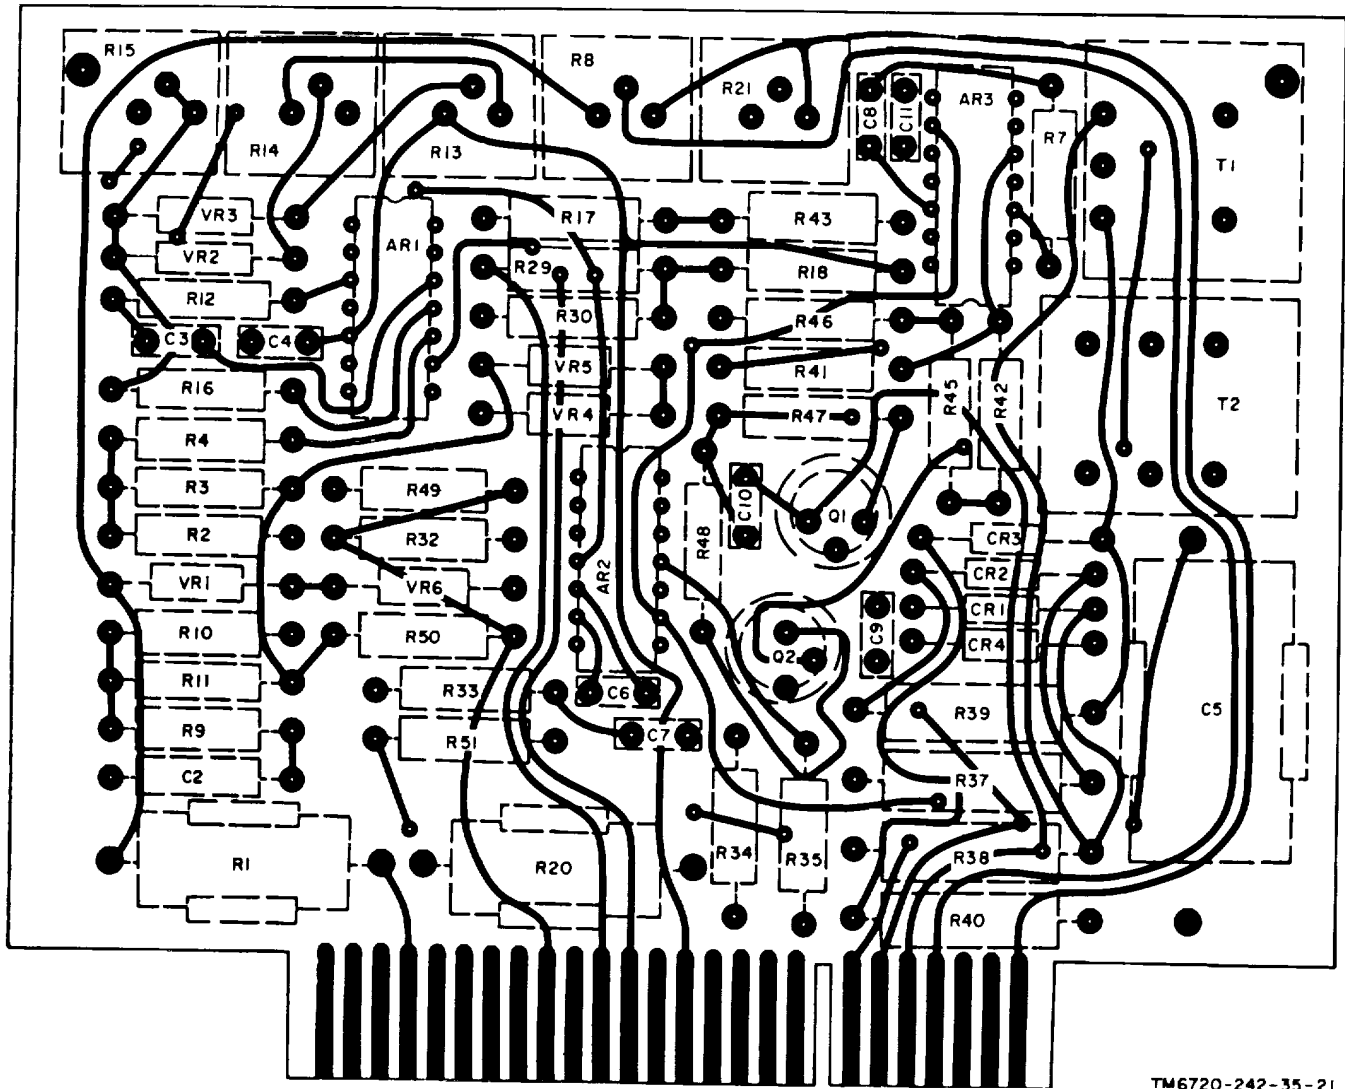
Automatic exposure control (aec) board assembly, wiring diagram, rear view.
